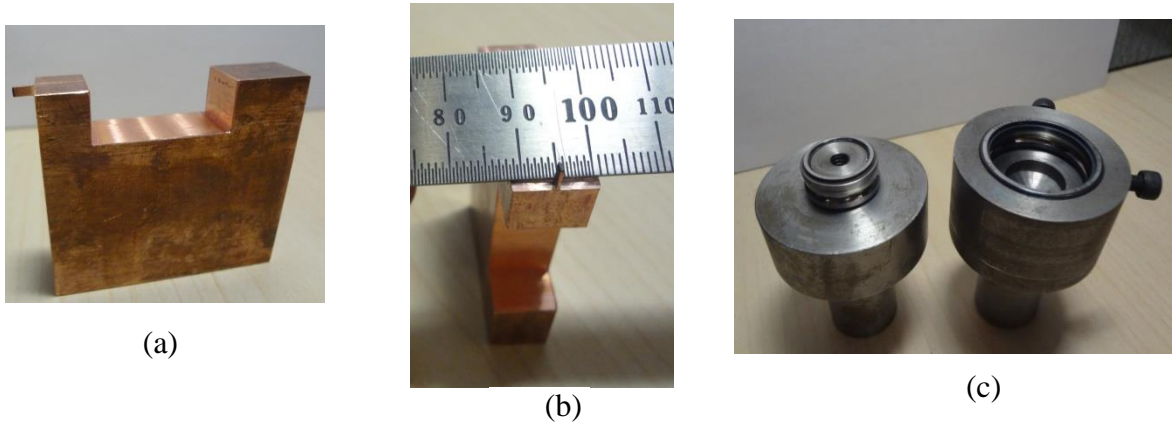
a) The EDM electrode, b) 0.6 mm electrode tip, and c) fixtures for both bearing inner and outer races
